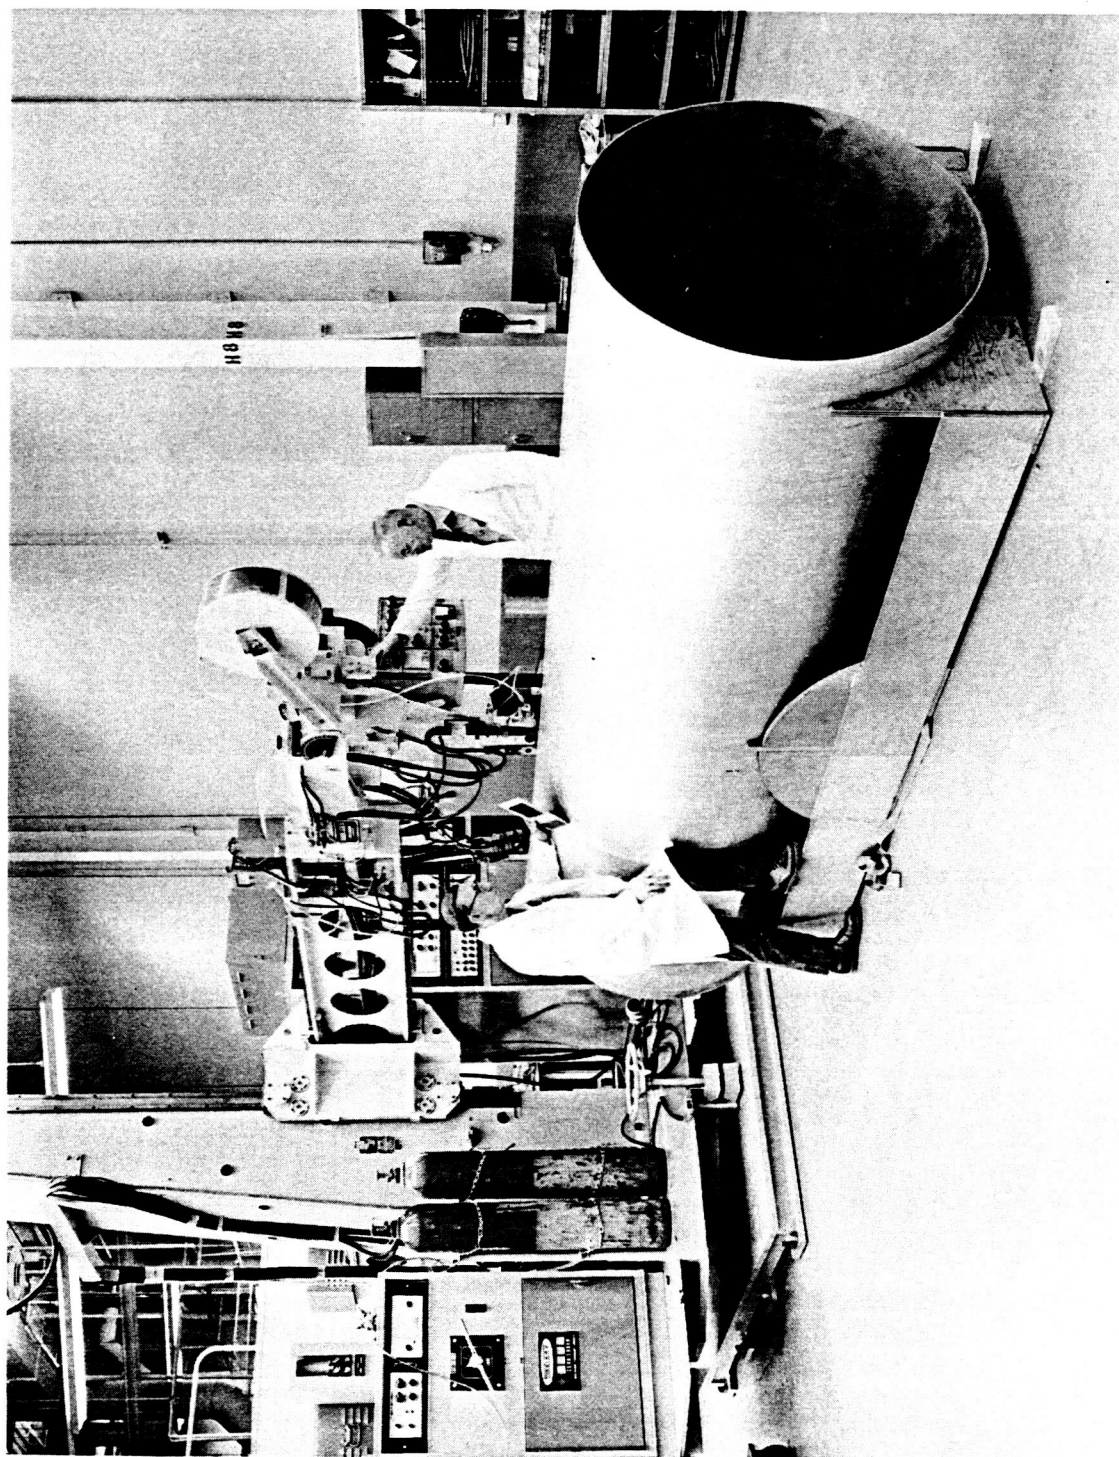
Photograph of Dewar Outer Shell Cylinder During Welding Operations
